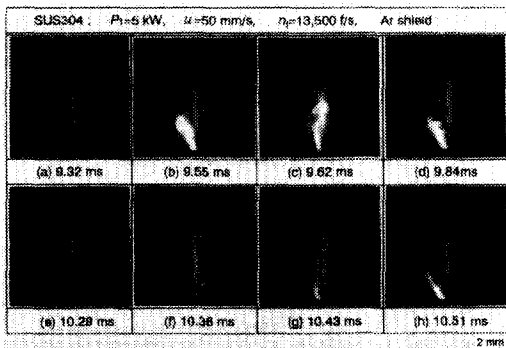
High speed photographs of plasma /plume induced from SUS 304 during laser welding in Ar shielding gas.
